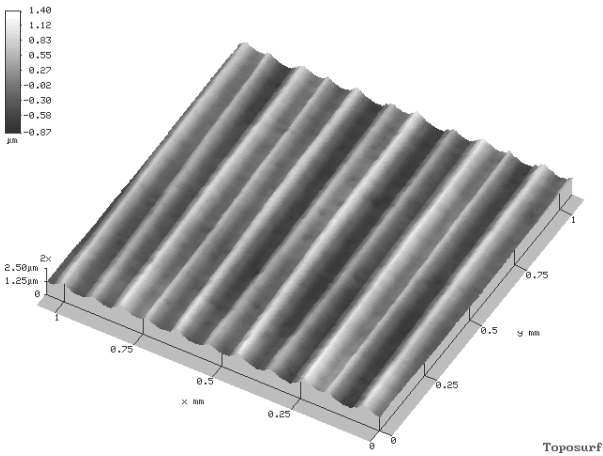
Isometric view of surface machined with mixed ceramic tools (HT2),  $S_{ra} = 0.43 \mu\text{m}$
